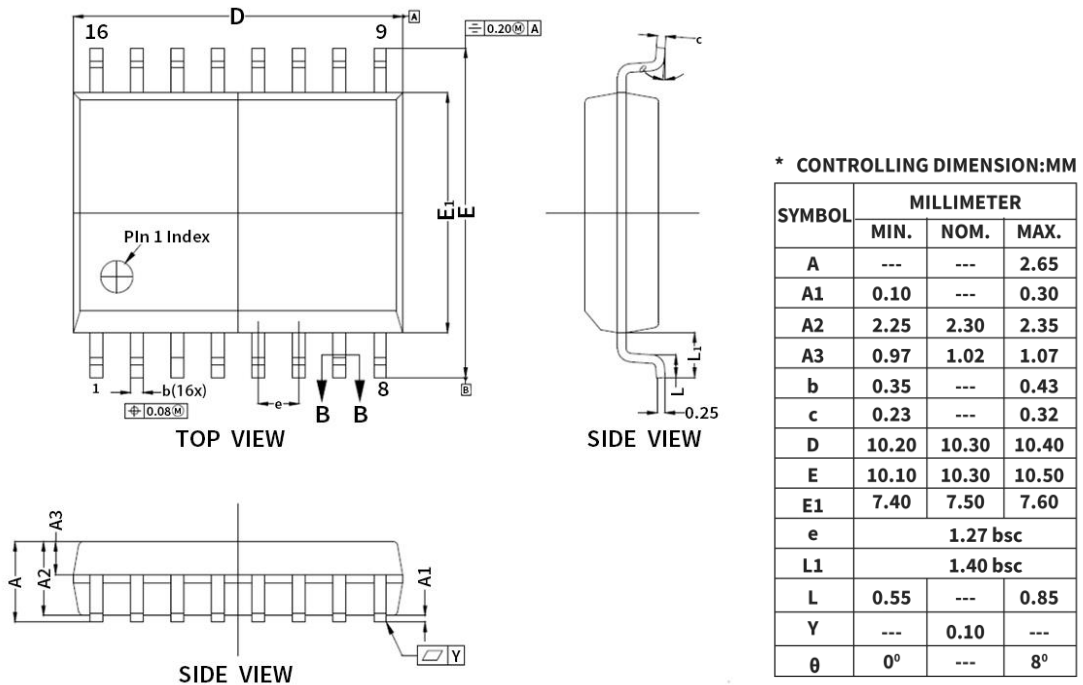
SOW16 Package Shape and Dimension in millimeters
